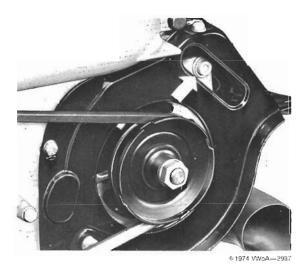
Socket head bolt (arrow) that holds upper side of alternator.
